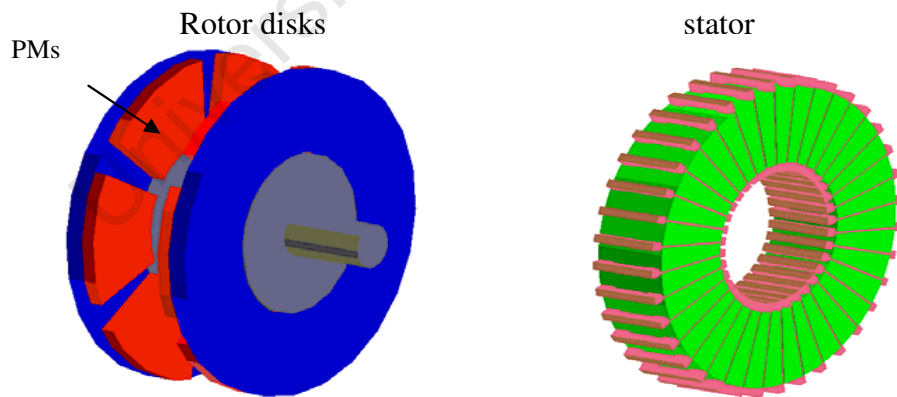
Double rotor axial flux machine [Source: Lipo]
